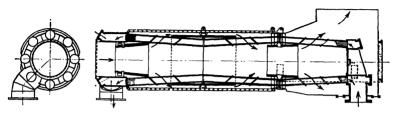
Gas-turbine plant regenerator designed for exhaust gas to make three passes over the tube exteriors while compressed air makes a single pass through the tube interiors.
